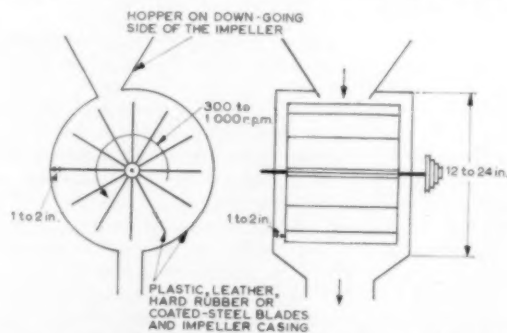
Suggested improved design of paddle-wheel type separator giving typical range of dimensions for most types of work.
